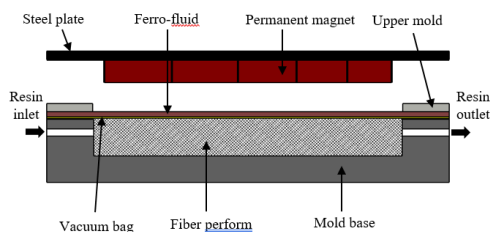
Magnetic compression resin transfer molding (MCRTM) mold component.
